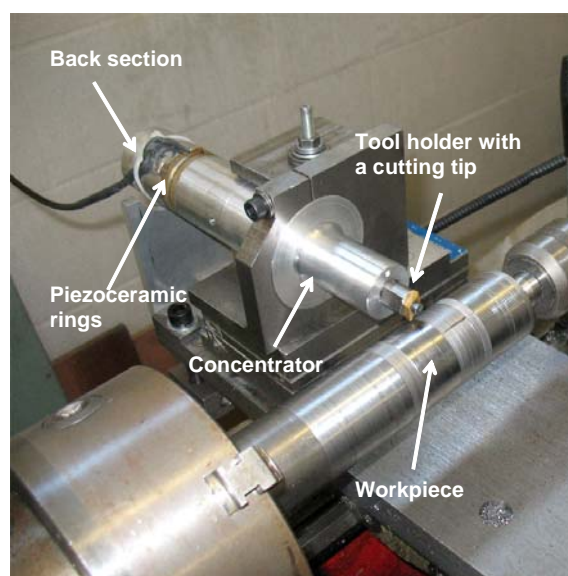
Experimental set-up of ultrasonically-assisted turning.
